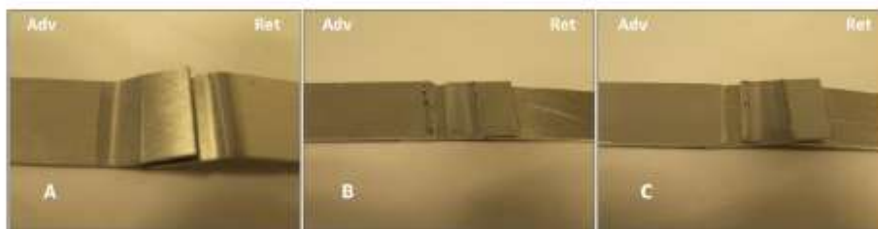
Fracture types in tensile shear strength specimens. (A) Type 1, shear fracture through the interface. (B) Type 2, tensile fracture through the hook feature. (C) Type 3, tensile fracture through HAZ.
